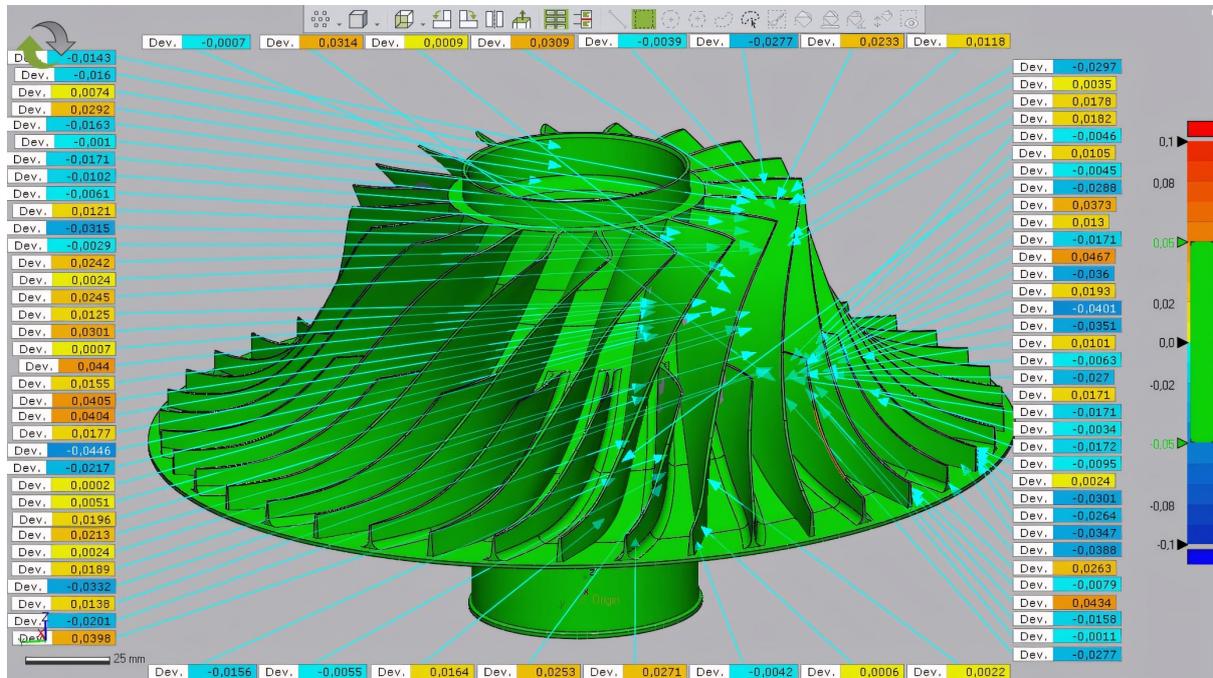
Checking the geometric accuracy of the digital 3D impeller model
